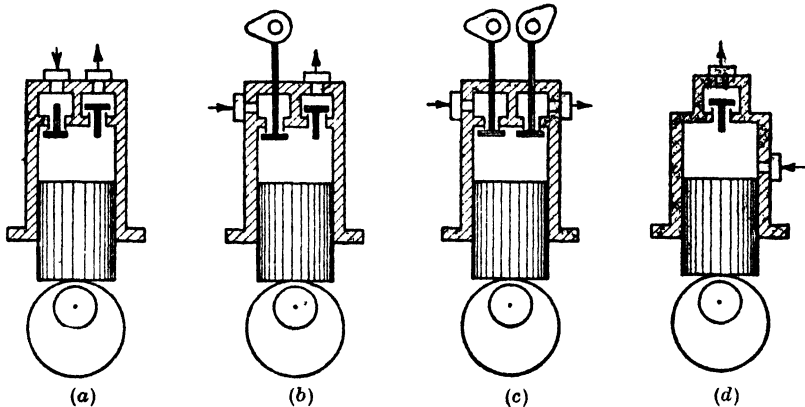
ELEMENTARY TYPES OF PISTON PUMP
